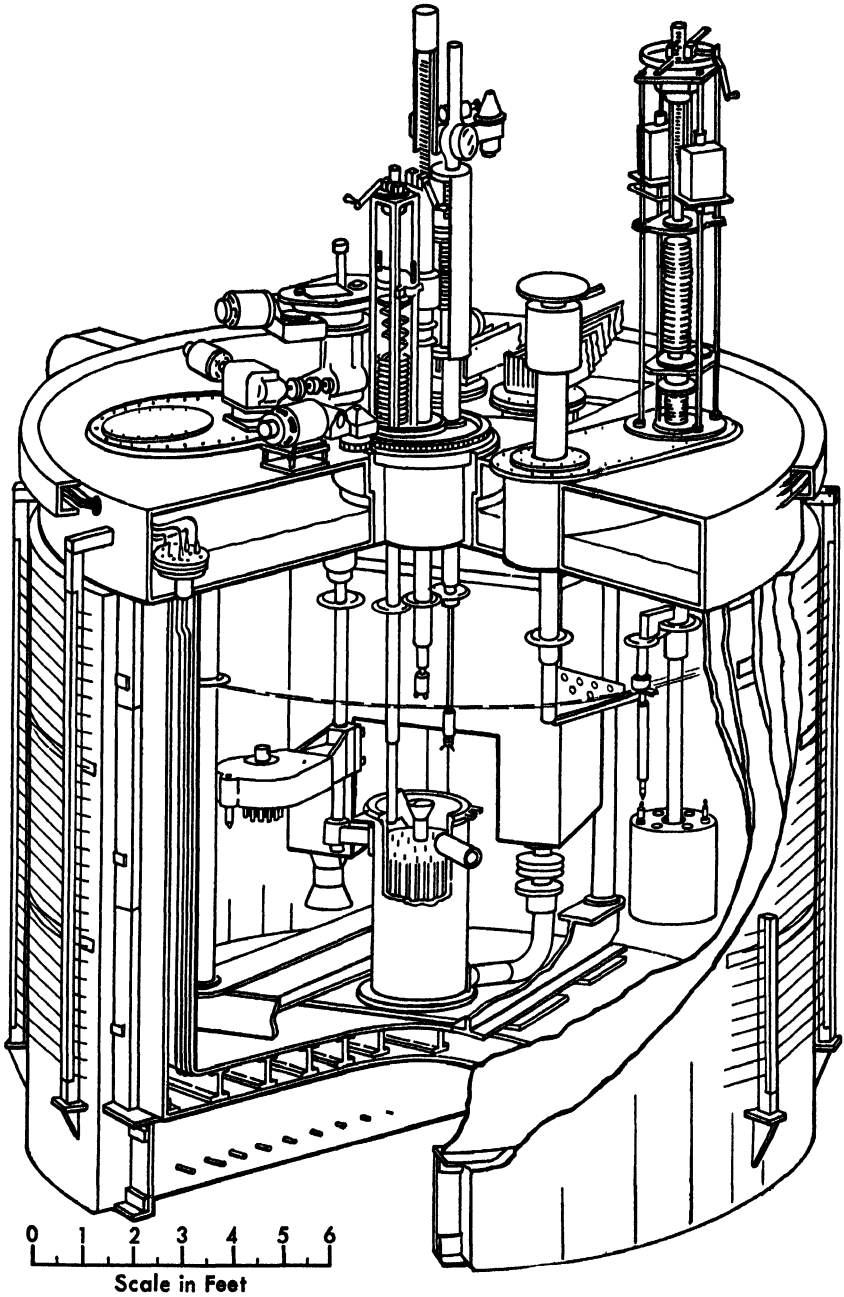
Cutaway perspective of EBR-II model tank, showing internal arrangement of core assembly, inner tank support, pump enclosures, and sub-assembly storage, as well as external top-mounted access and handling equipment.
